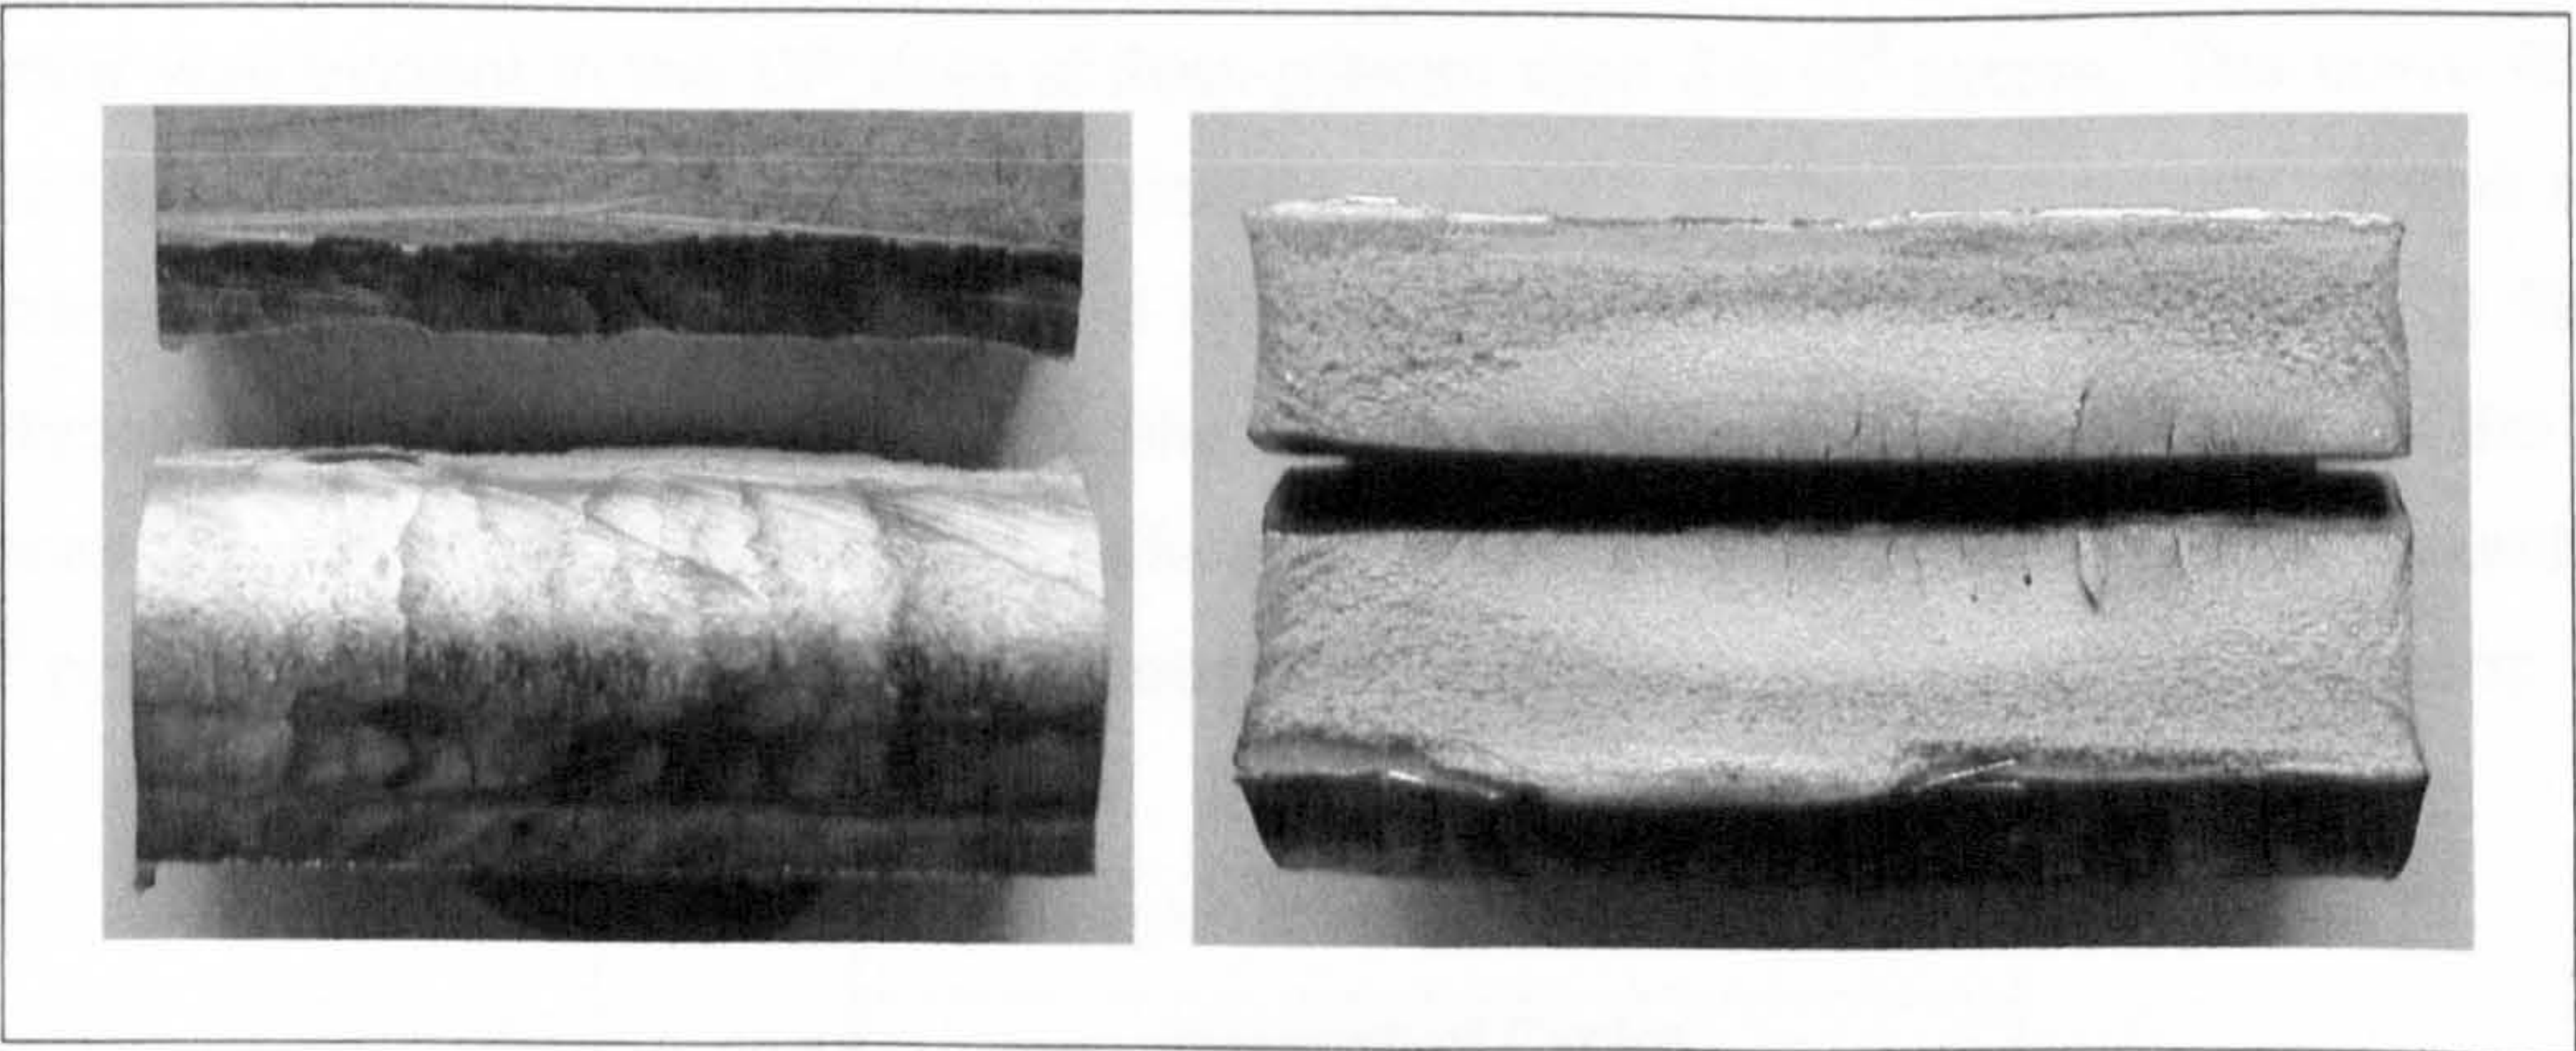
Typical MIG HI fracture path (left) and fracture surface (right) (MIG HI 2).
